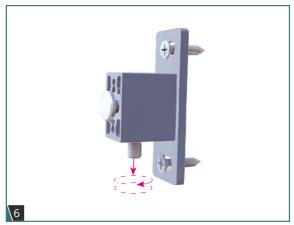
Loosen the screw securing the pin in the mounting bracket.
